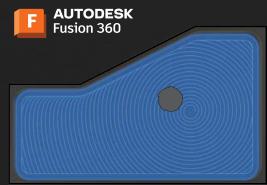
HEM Tool Path Example (Shown, is the adaptive clearing tool path generated by Autodesk® Fusion 360™
